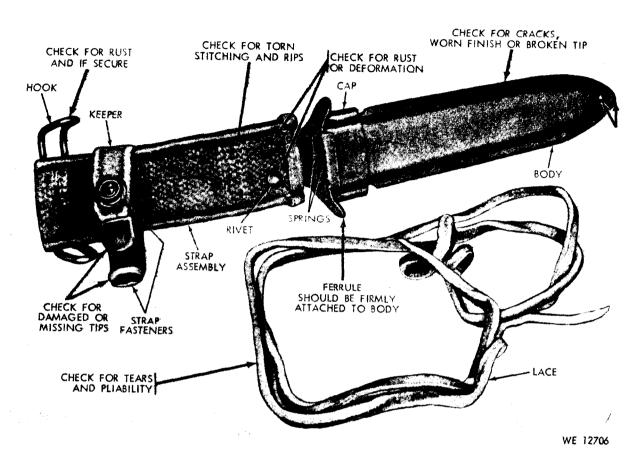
Inspection points for scabbard-bayonet knife M8A1.
